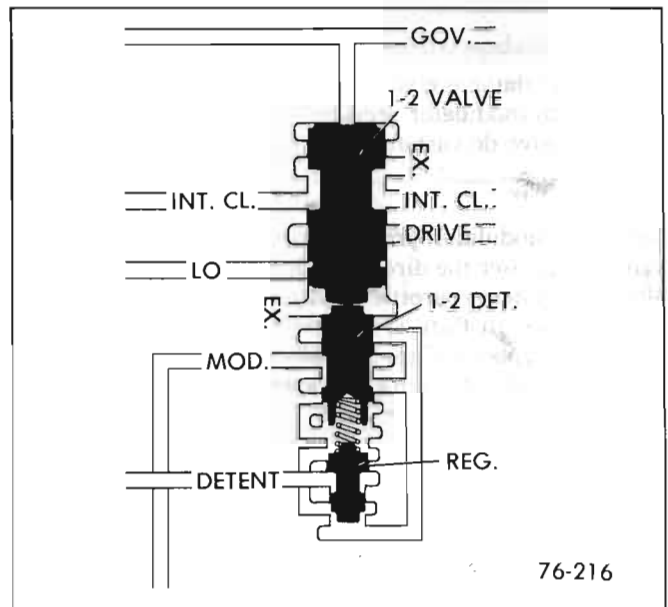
1-2 Shift Valve and 1-2 Detent Valve and Regulator Valve (Typical)
